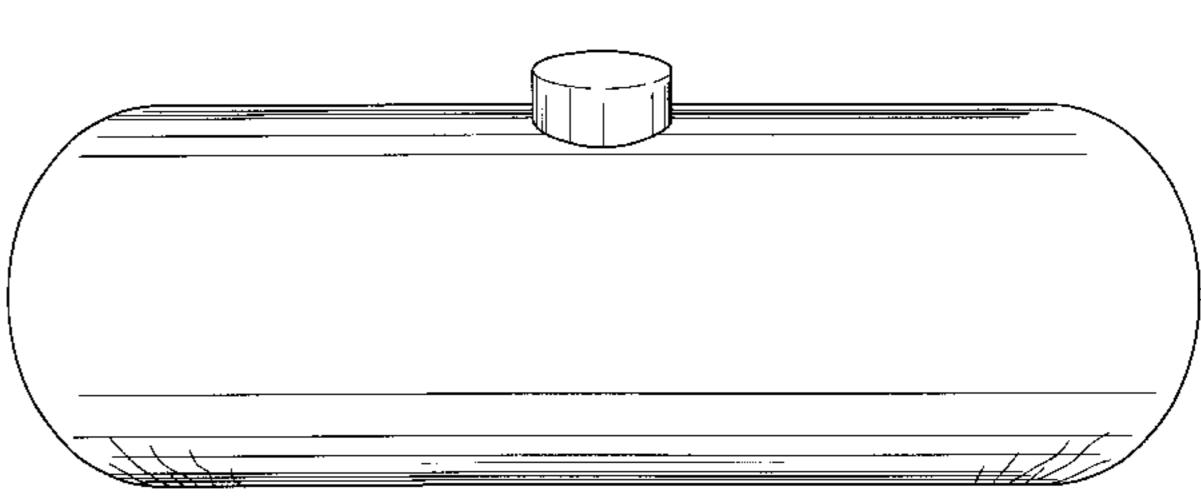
is a front and back view of a second embodiment of a one piece tank cover in accordance with the present invention;
